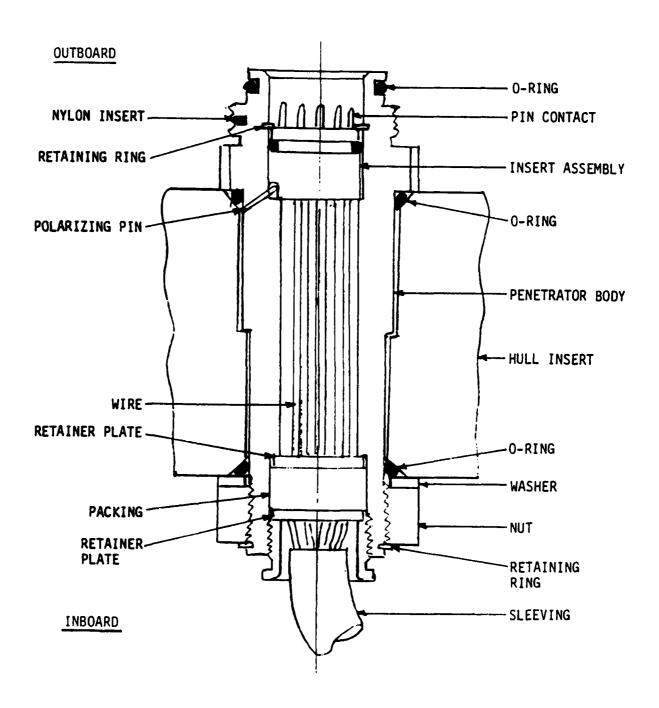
MIL-C-24231 single connector hull penetrator.
